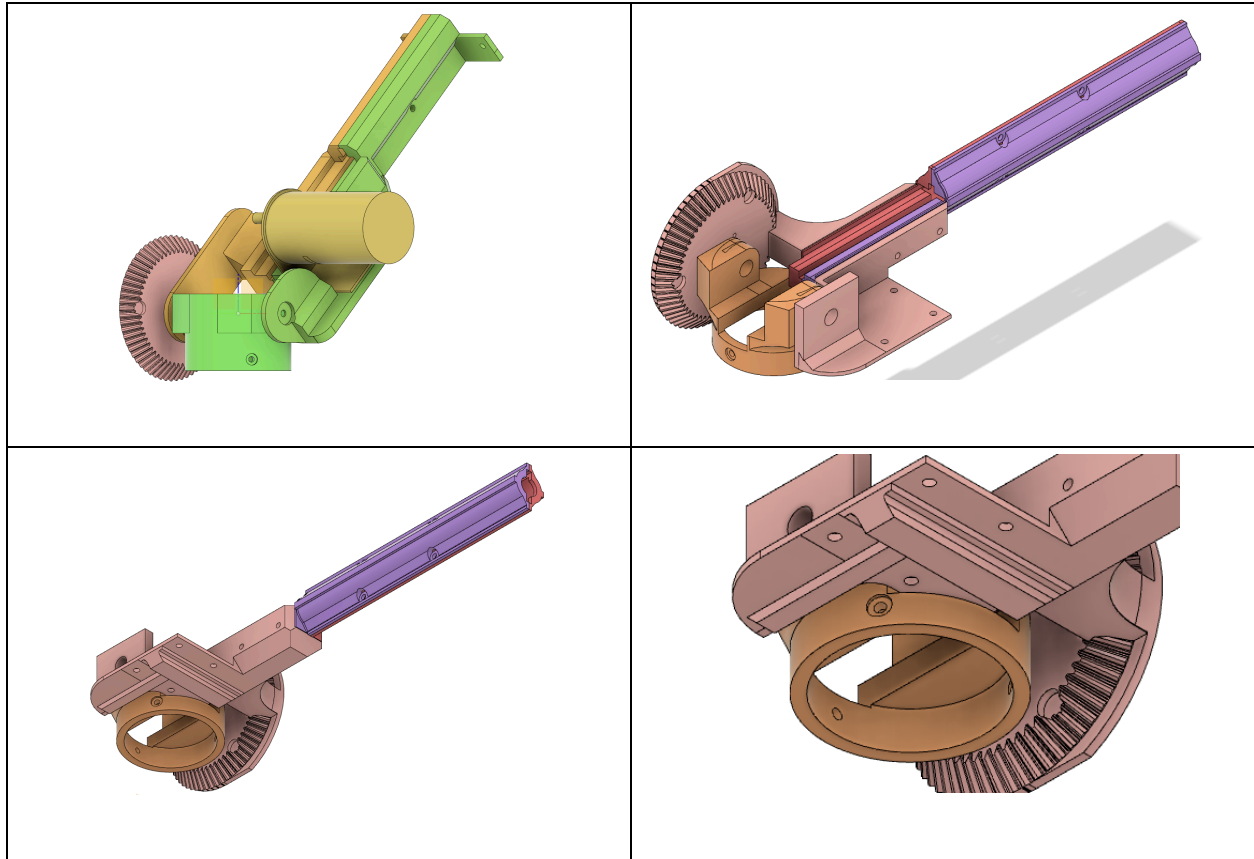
A (top-left): PongBot Assembly Version 2 comprised of 3 separate components\*. The bevel gear, left, and right brackets that enclose the spring/plunger and fasten the barrel to the pan/tilt assembly. B (top-right): PongBot Assembly Version 3 comprised of 3 separate parts. The bevel gear and bracket components have been merged to a single piece and the barrel is still in two components fastened in place with M3 bolts. C & D (bottom-left, bottom right): PongBot Assembly Version 3 with a view of the ribbing added to prevent flexing along the ribs axis. \*Note: Colors identify individual components of assemblies.
